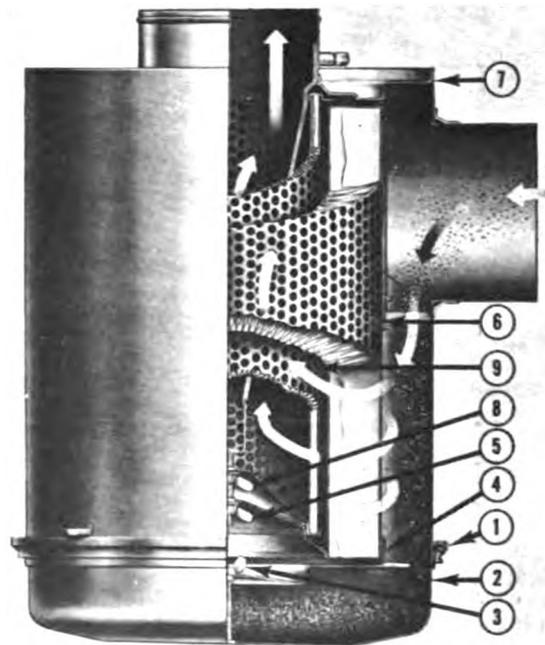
(OM1030L). Air cleaner—heavy duty dual element
